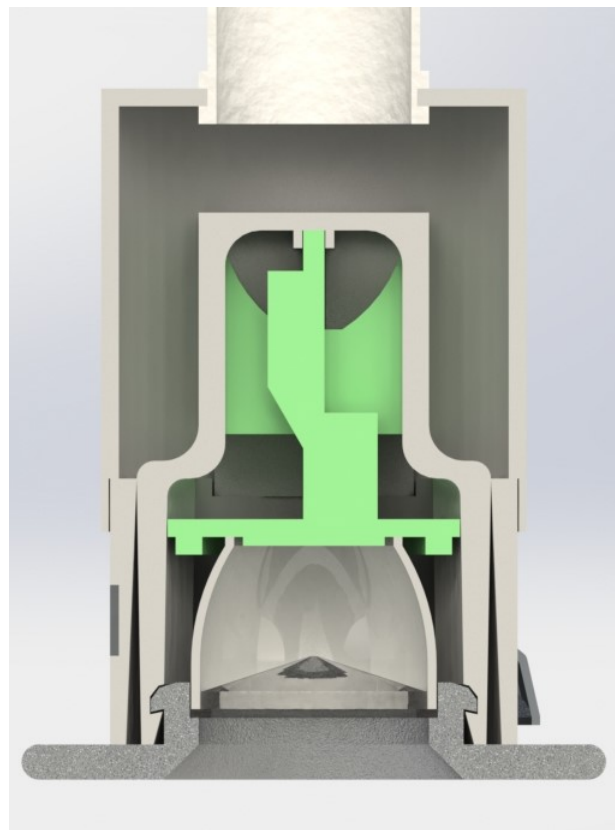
Full assembly in section view of the final concept 4, were the green parts is a representation of the PCB
